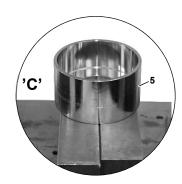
Installing the circlip (snap ring) for wheel bearing.
